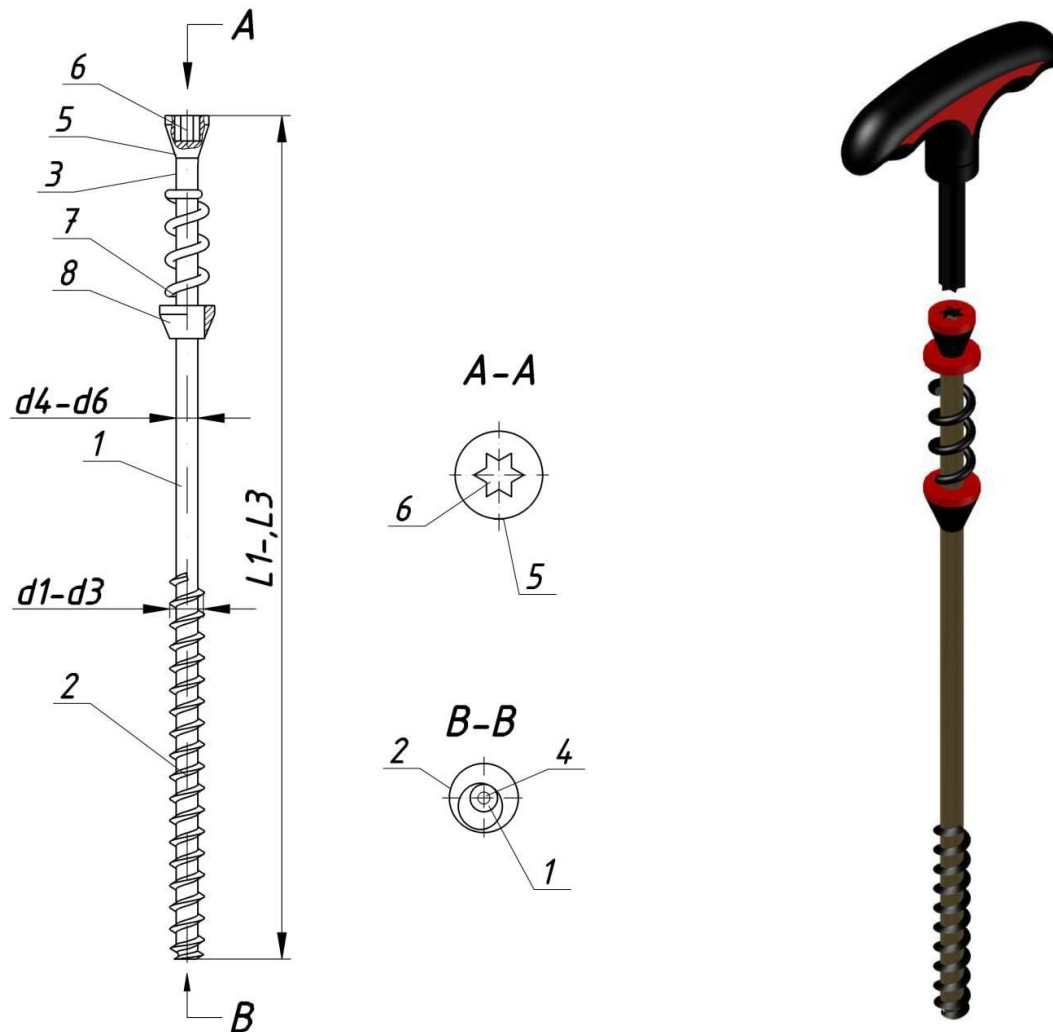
Universal compression intramedullary screw system used for fixation of olecranon and proximal/middle third ulnar fractures: A cylindrical shaft (1), A threaded distal segment (2), A non-threaded proximal shaft portion (3), A centering recess at the distal tip (4), A proximal fixed washer (5), A hexagonal socket for controlled insertion (6), A compression spring mechanism (7), A conical sliding washer (8).
